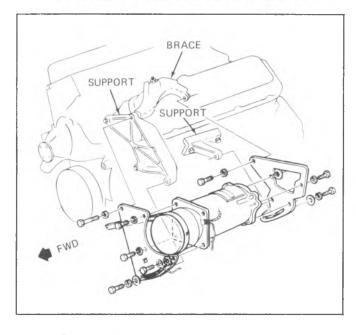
A-14V--A/C Compressor mounting-Mark IV
